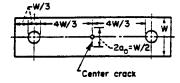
Center-Notched Tensile (CNT) Specimen.
